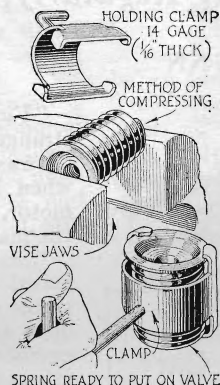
This homemade holding clamp will prove useful when you have stiff valve springs
